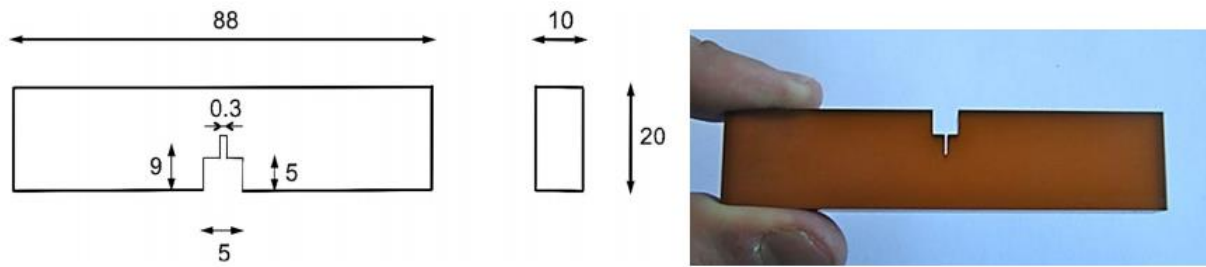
Cured and machined SENB sample and its dimensions. [89]
